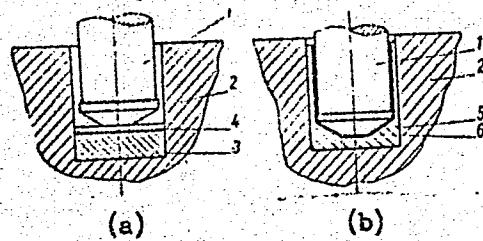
Press for plating with soft metals (a - before cold-molding; b - after cold-molding and plating)
